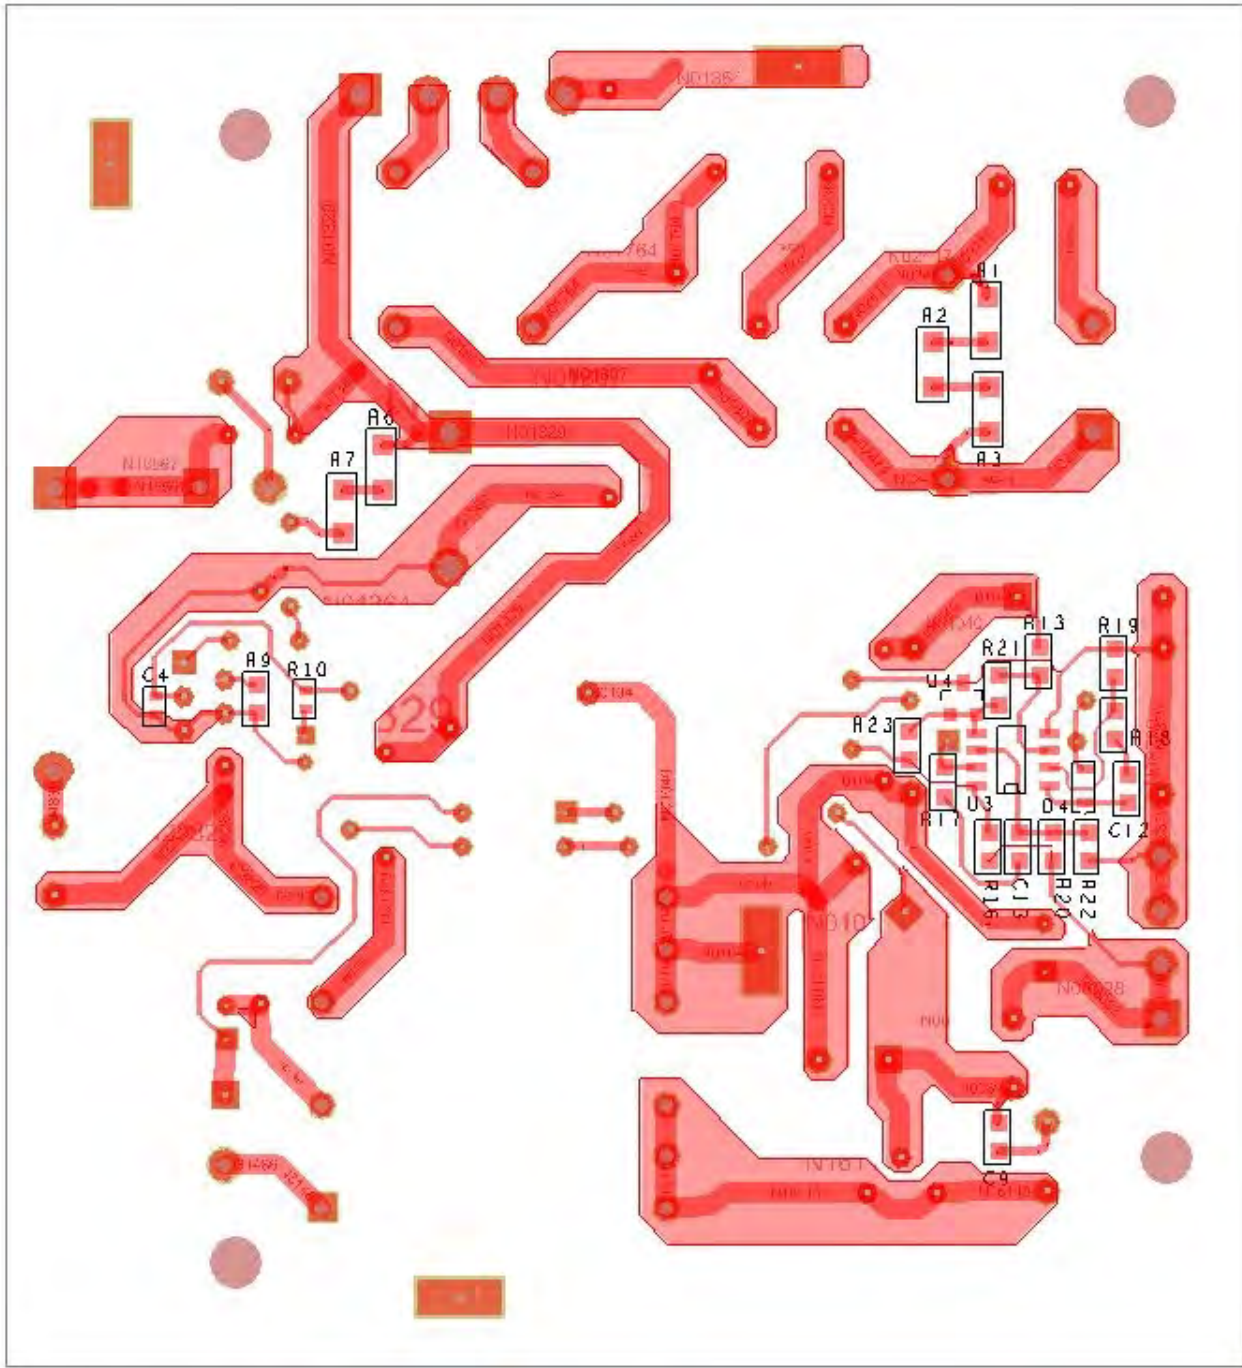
Printed Circuit Layout, Bottom Side Traces and Components.
